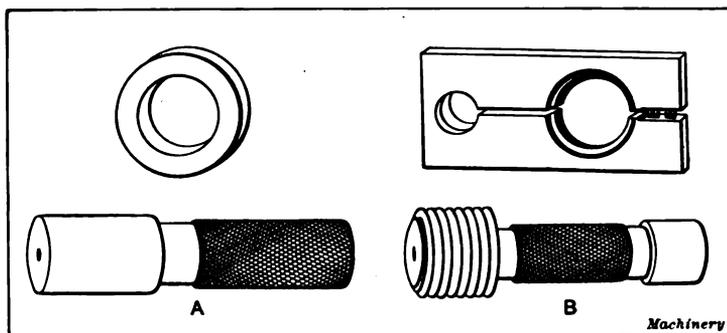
(A) Plug and Ring Gages (B) Internal and External Thread Gages
